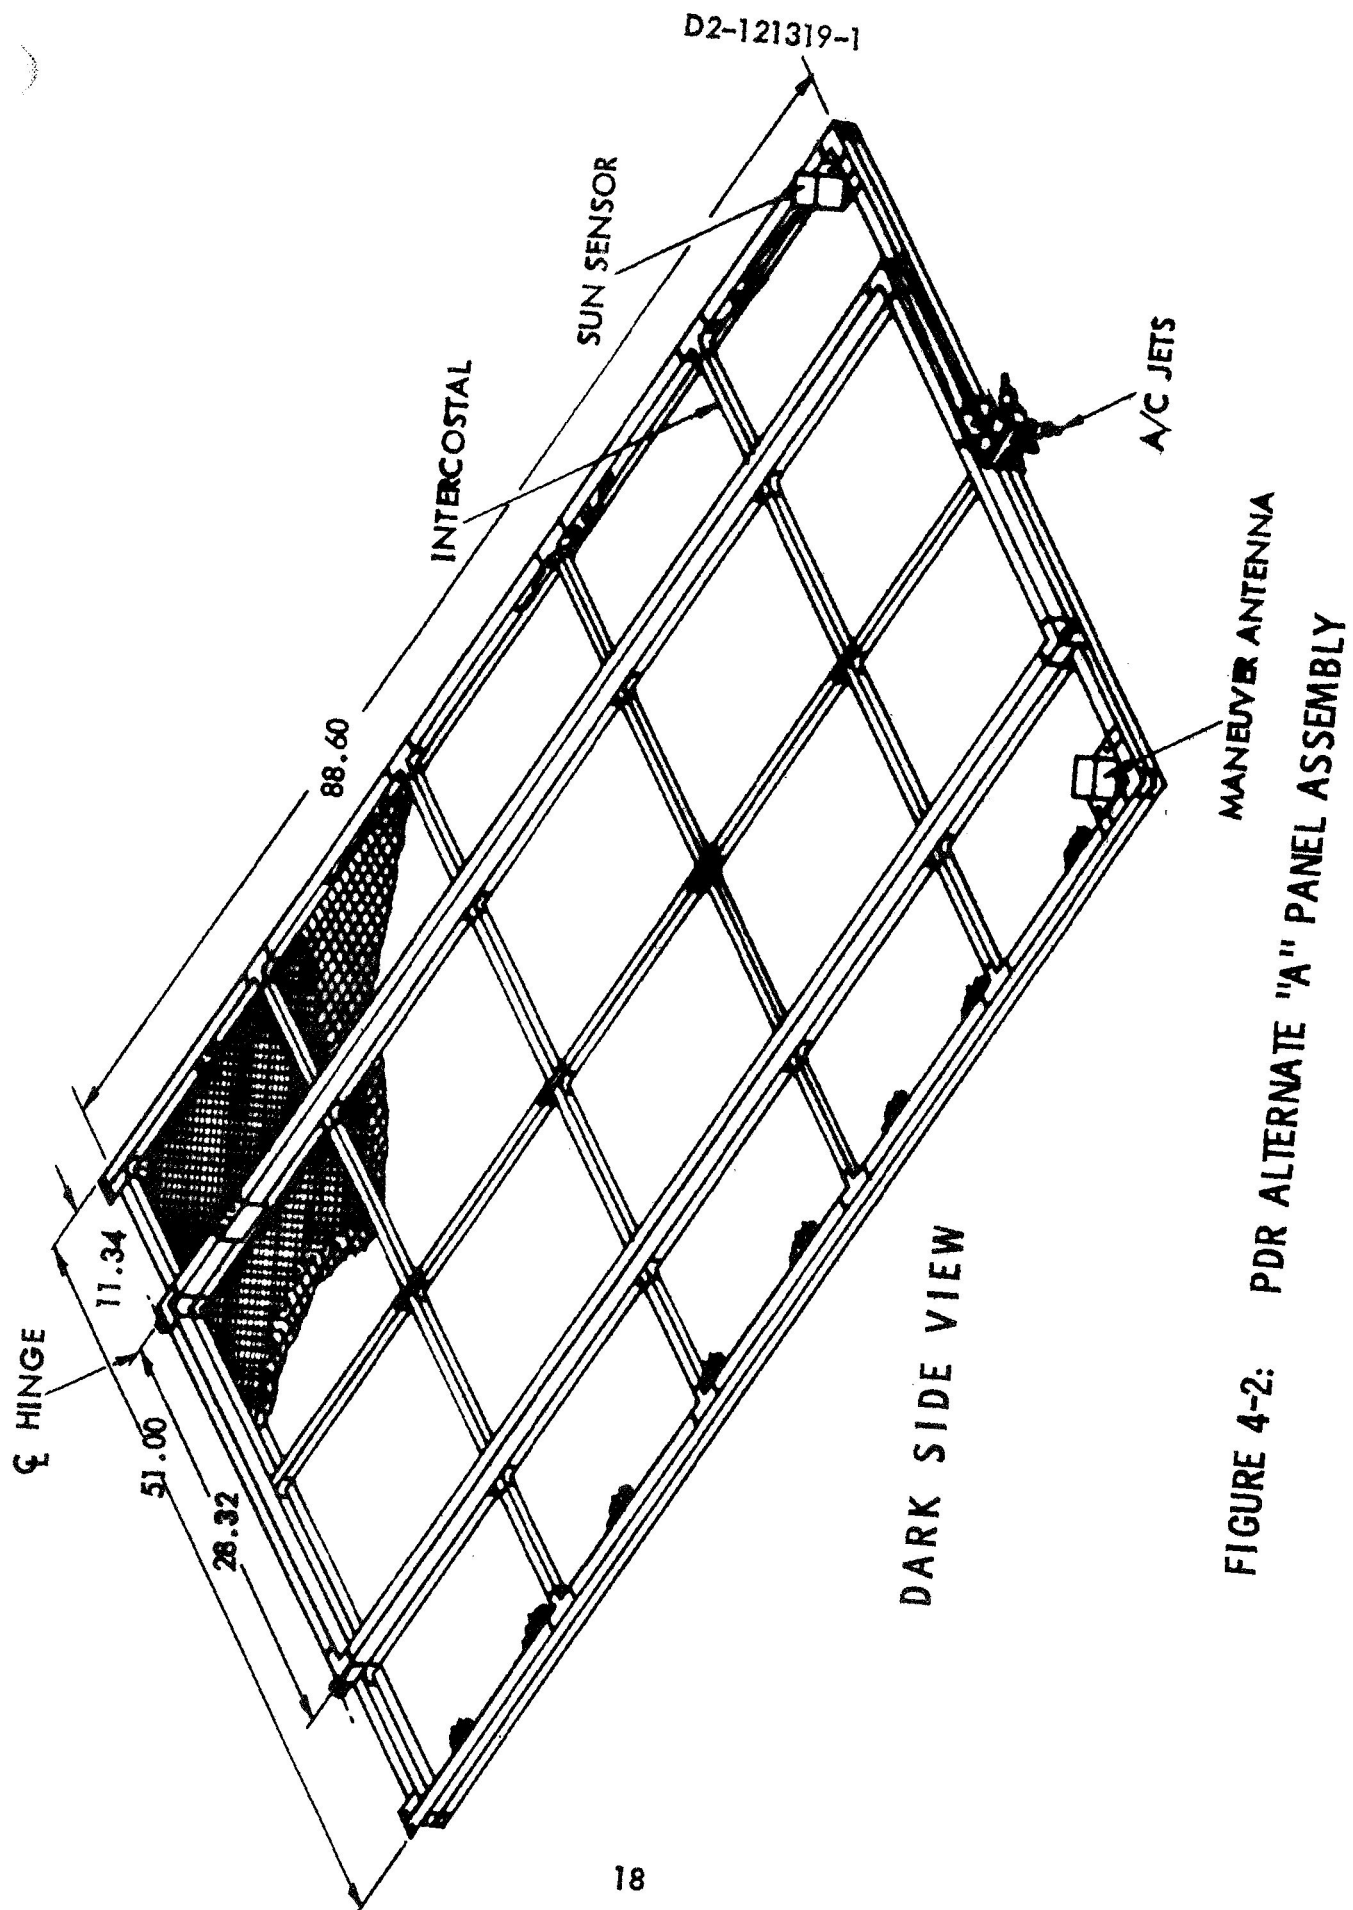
PDR ALTERNATE "A" PANEL ASSEMBLY
